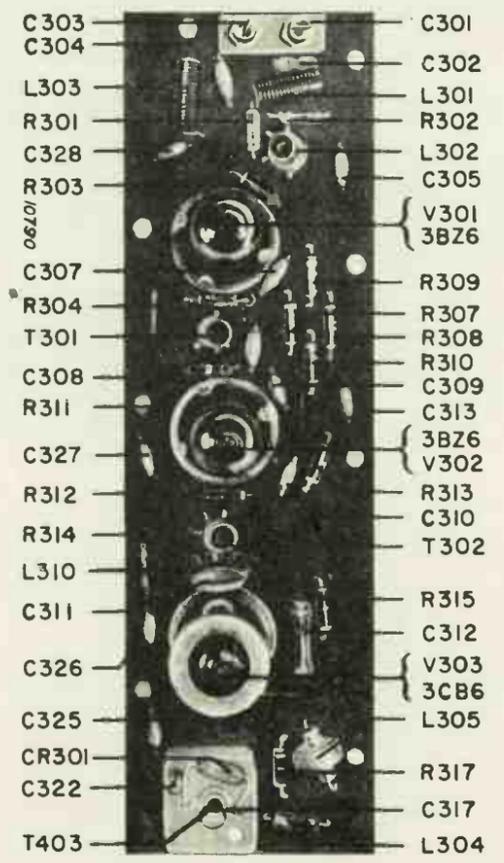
View of Component Side of Printed Wiring IF Board A5775-1.
